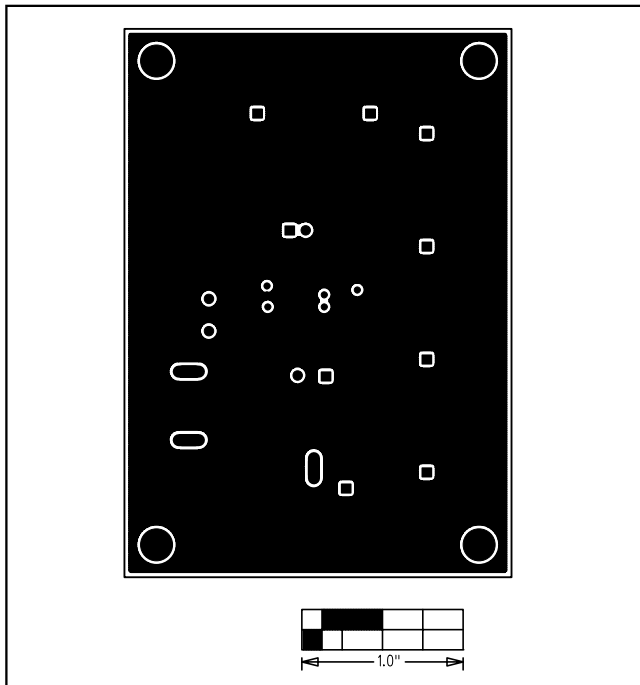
MAX9486 EV Kit PC Board Layout—Inner Layer 2 (GND Layer)
